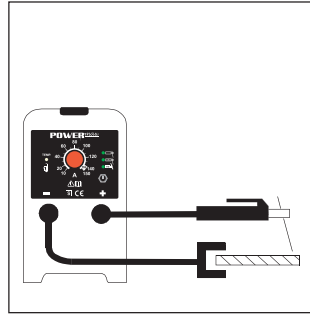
POWERmax tooled up for rod electrode welding
